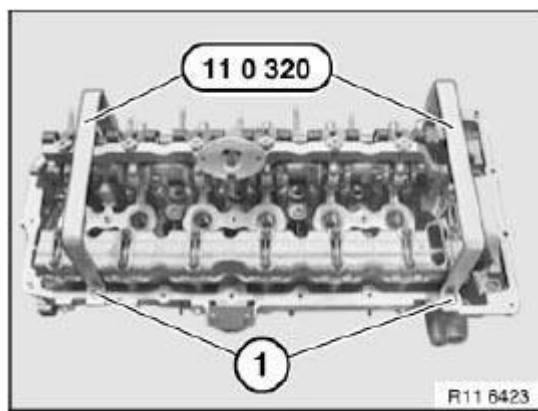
Securing Special Tool (11 0 320) With Existing Cylinder Head Cover Bolts
